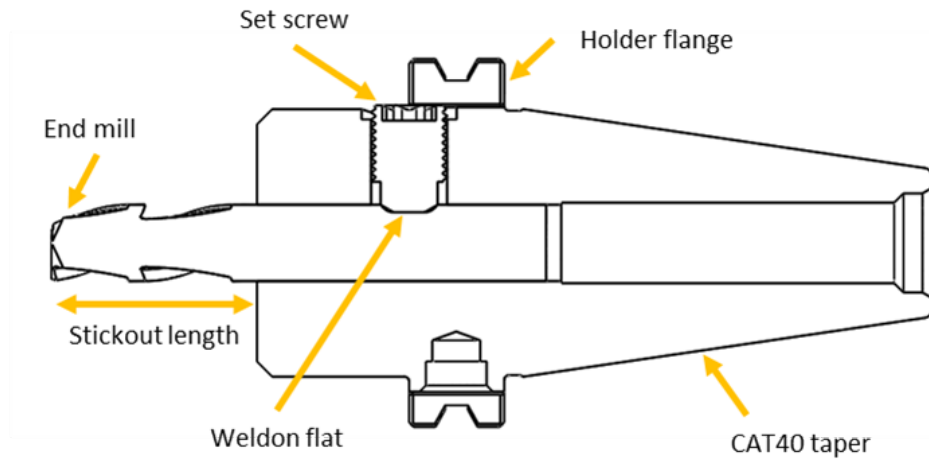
The cross-sectional view of a set screw holder. The set screw clamps against a Weldon flat, which is ground on the tool shank, to secure the tool in the holder.
